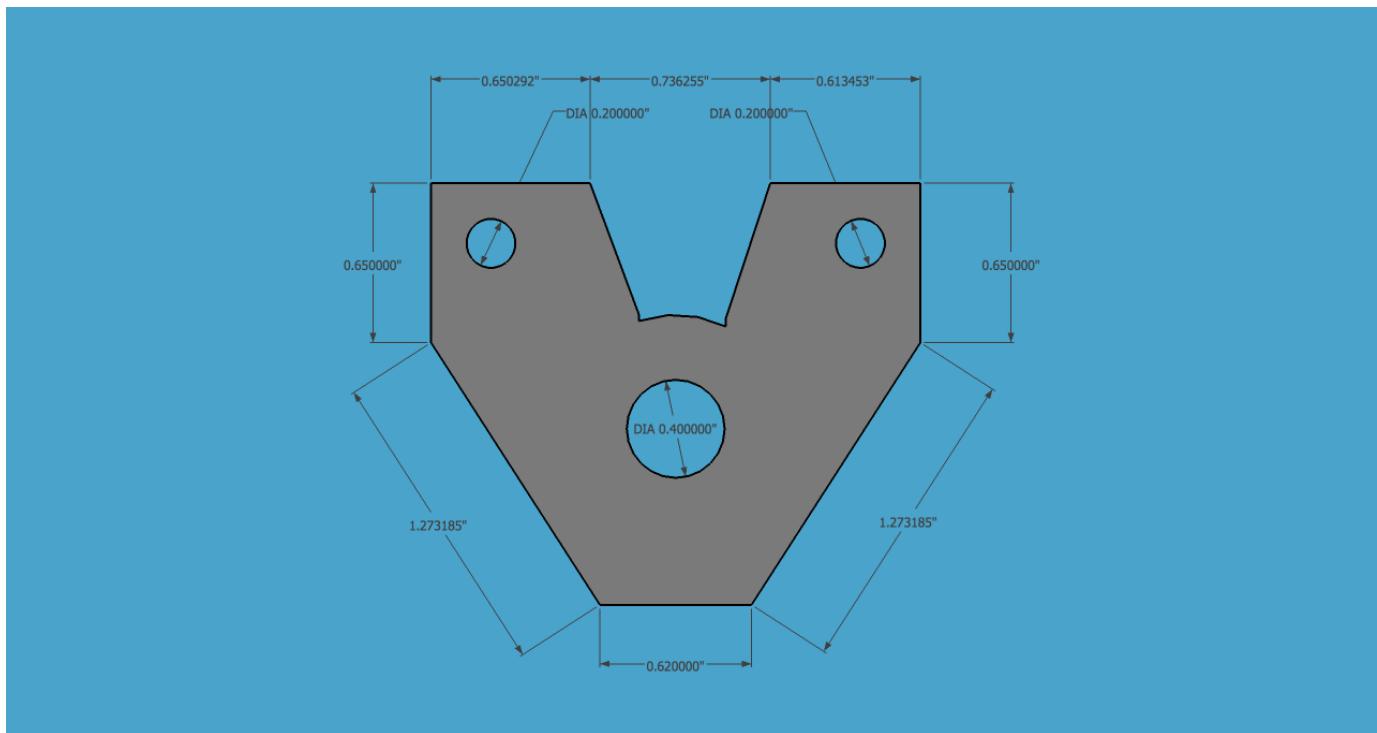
The bottom up view and measurements of the sFPI aluminum base
